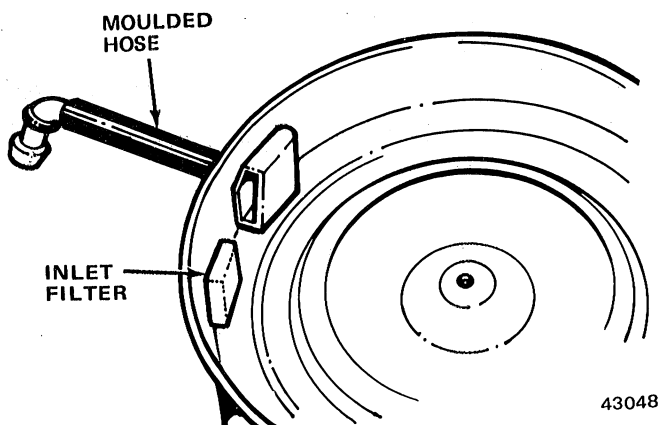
A-12 PCV Air Inlet Filter—Four- and Six-Cylinder Engines
